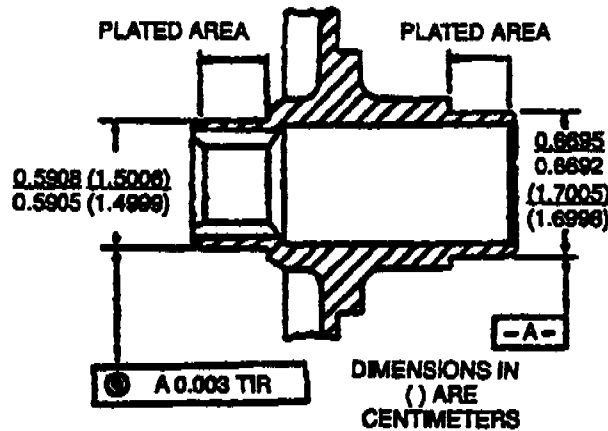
Oil Pump Drive Gearshaft Assembly - Plating Area.
